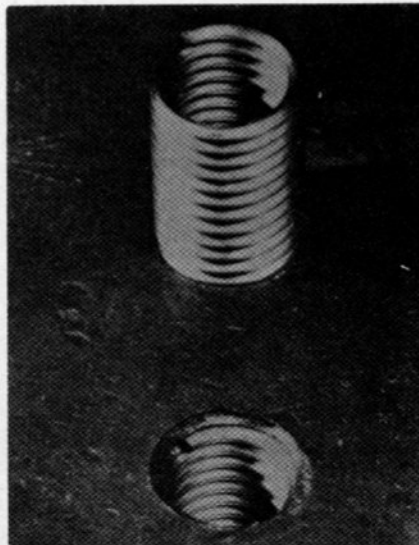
A thread insert and a complete repair are shown above. Special tools are provided in thread repair kit for installation of thread insert.
